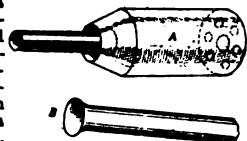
Noise amplifying exhaust to give rear sound to small engine
